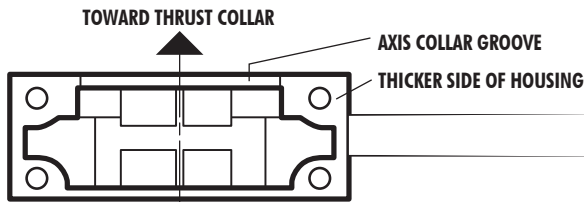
(Above) Detail of the encoder housing showing direction of installation
